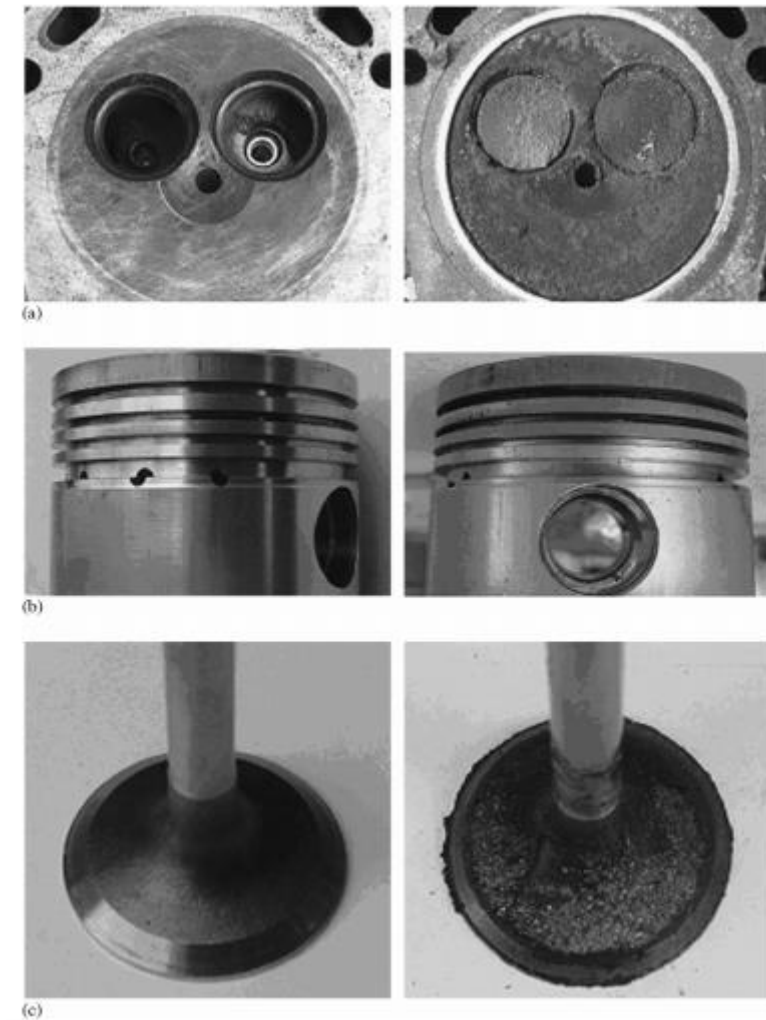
the Comparison between engine components before and after the 2000 h endurance test: (a) cylinder head; (b) piston and (c) exhaust valve.
